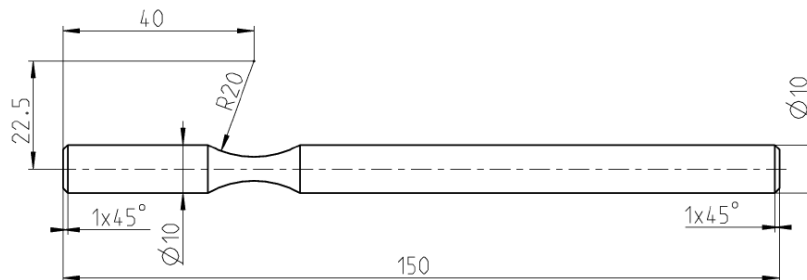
Shape and dimension of the specimen for multiaxial fatigue test.
